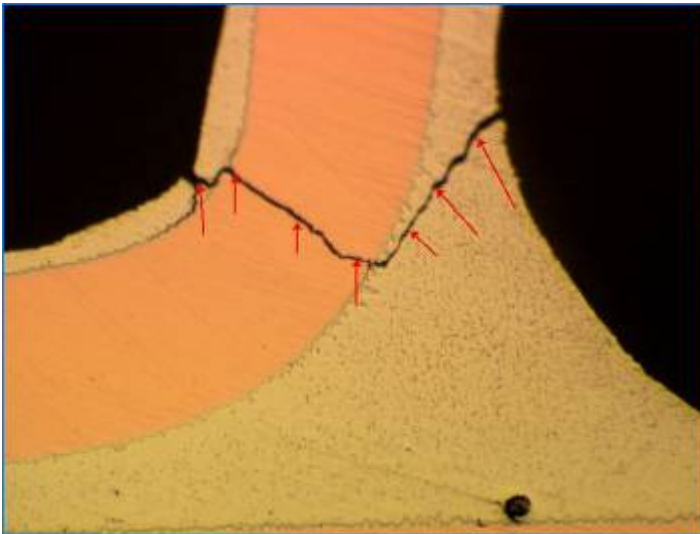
cross section, SN63, U41, left lead crack, 200xb
